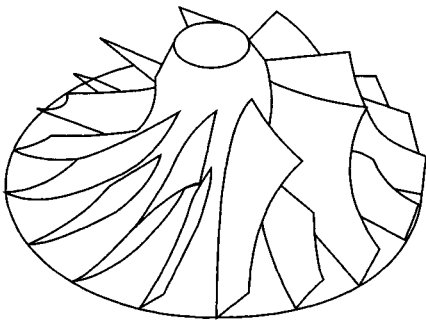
Automotive turbocharger compressor impeller, with splitter blades.
